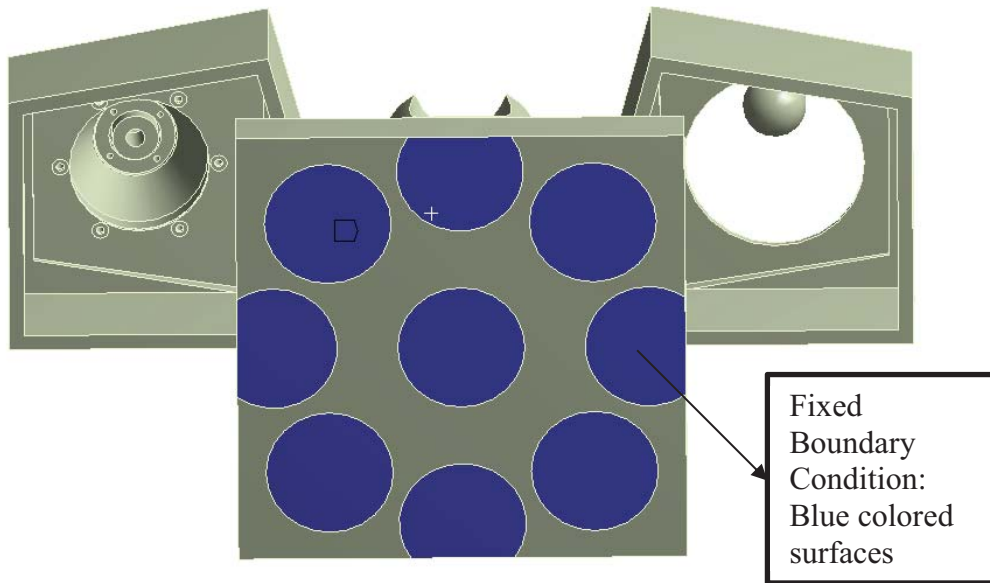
The pressure cone surface on which the test fixture is fixed
